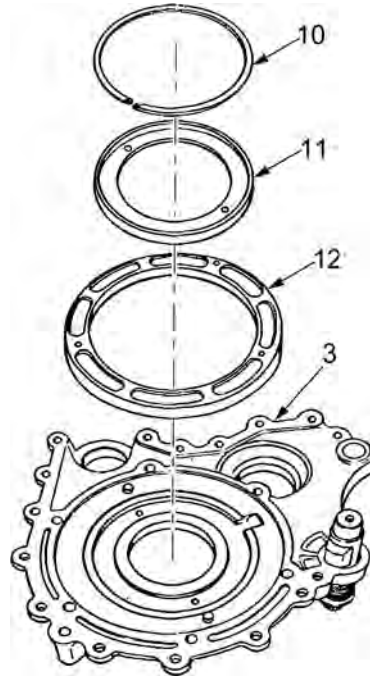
Packing Retainer, Stationary Cam, and Seal Ring Removal.
